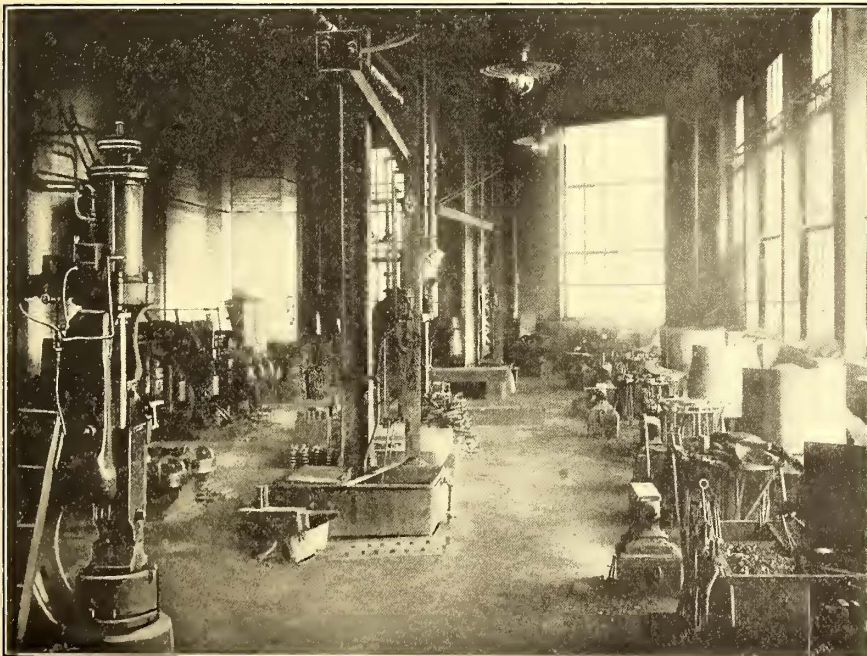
VIEW OF THE BLACKSMITH SHOP, SHOWING FORGES, TOOL TURRETS, ETC.
